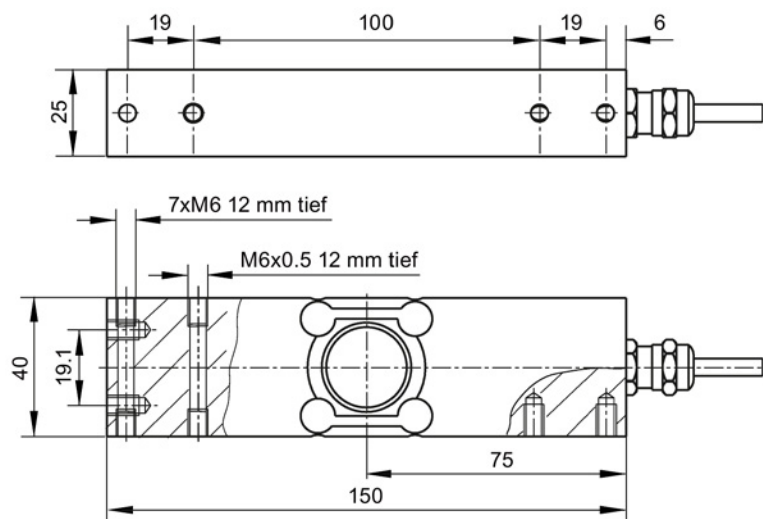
Dimensional drawing SP-S SC 10 to 50 kg
